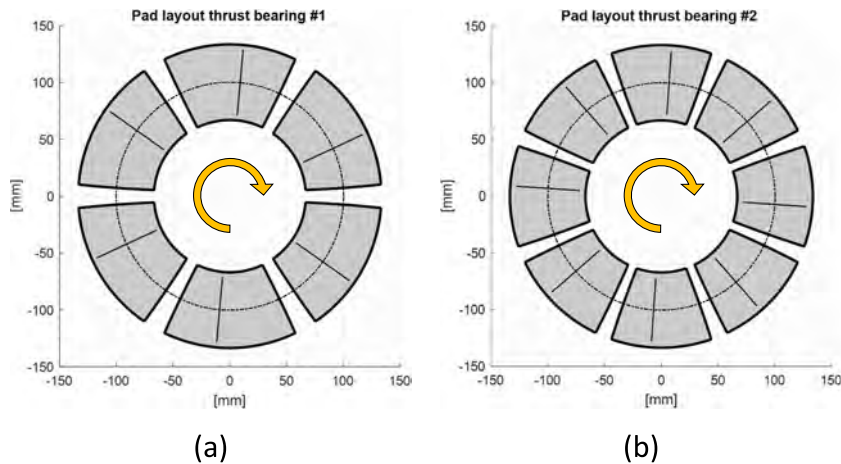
Pad layout of thrust bearing #1 (a) and thrust bearing #2 (b), pivot is highlighted for each pad, the direction of collar rotation is shown for clarity. Geometry from [6].
